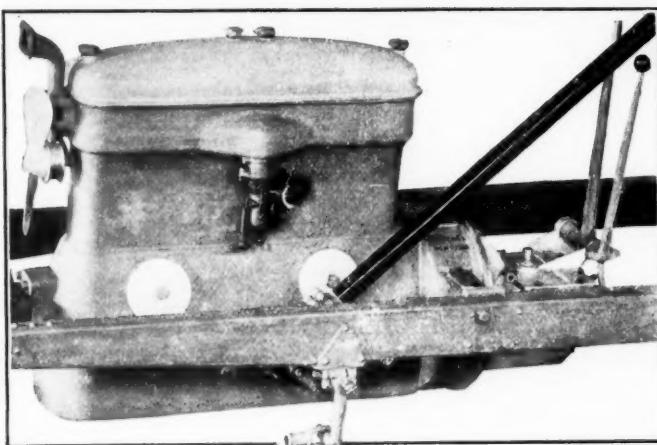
Intake side of Weideley motor, showing absence of intake manifold, mounting of gearbox as a unit with the motor, cover plate for valve mechanisms and fan mounting
